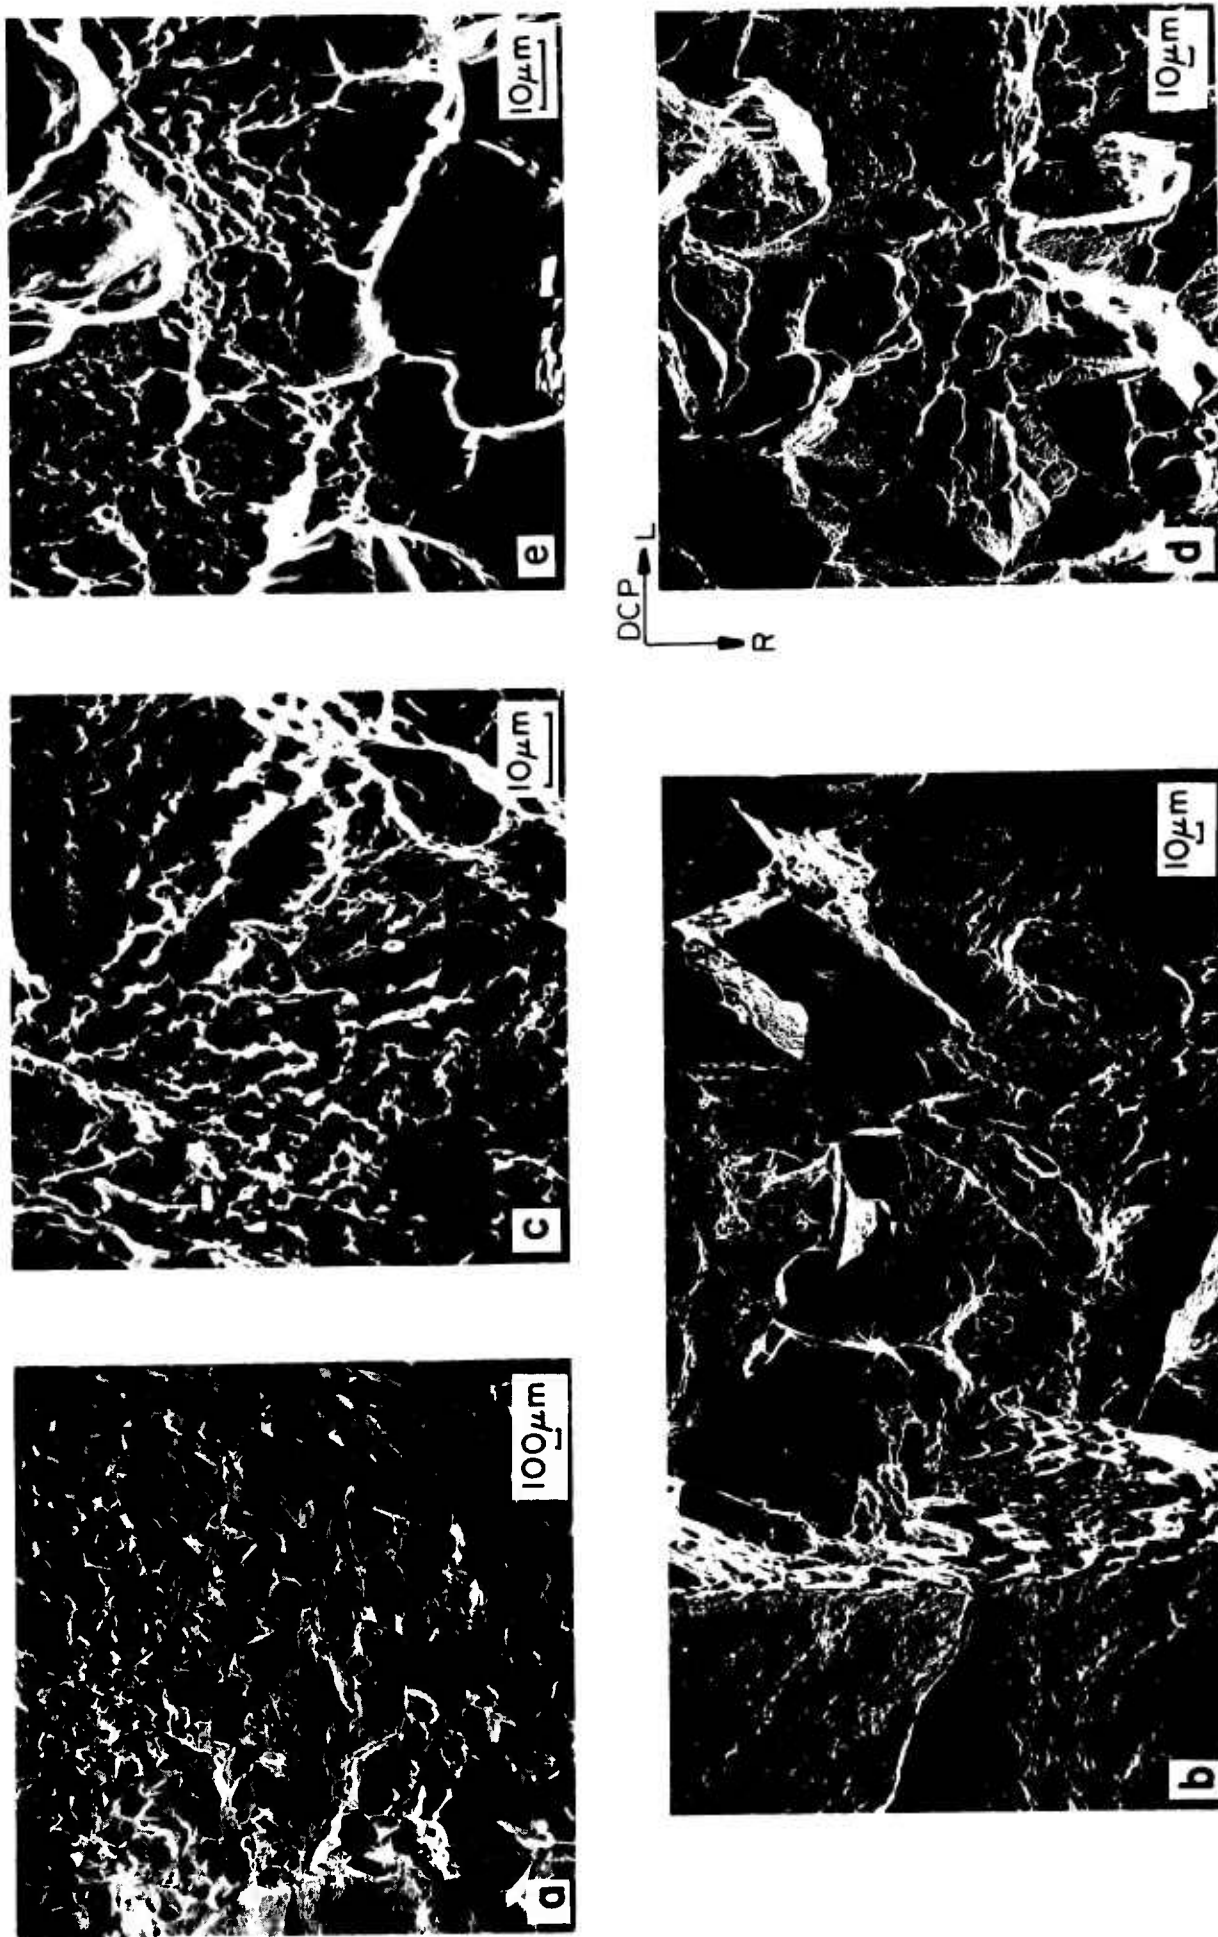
Alloy 227, sample 7MSL4. SEM of fracture surface (a) X25, (b) X250 - precrack/fast fracture transition, (c) X900 - fast fracture close to transition, (d) X250, (e) X900 - fast fracture.
